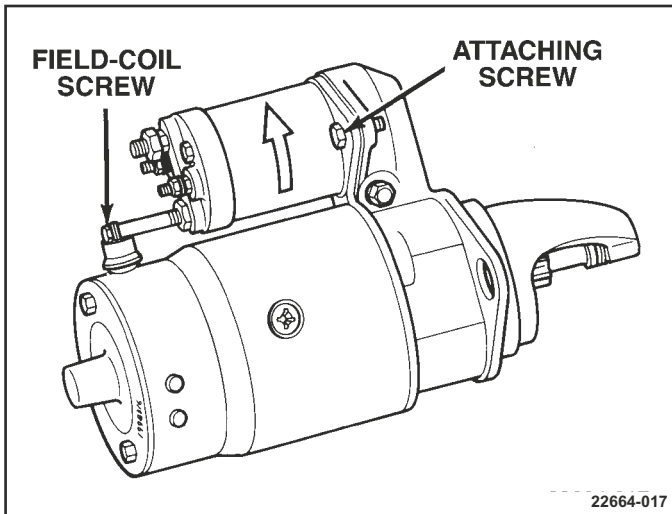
Field Coil-to-Solenoid Strap Removal
